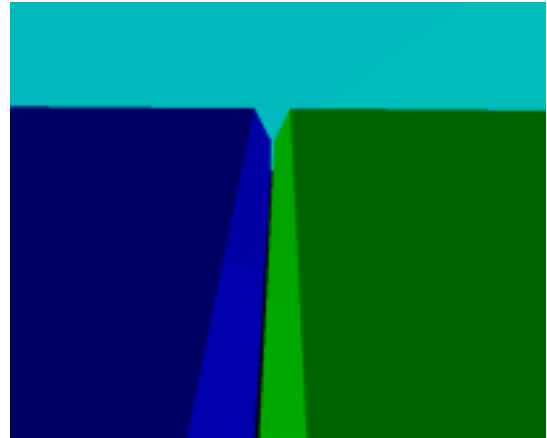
Ending of seam to be welded, from a CAD system via VRML.
